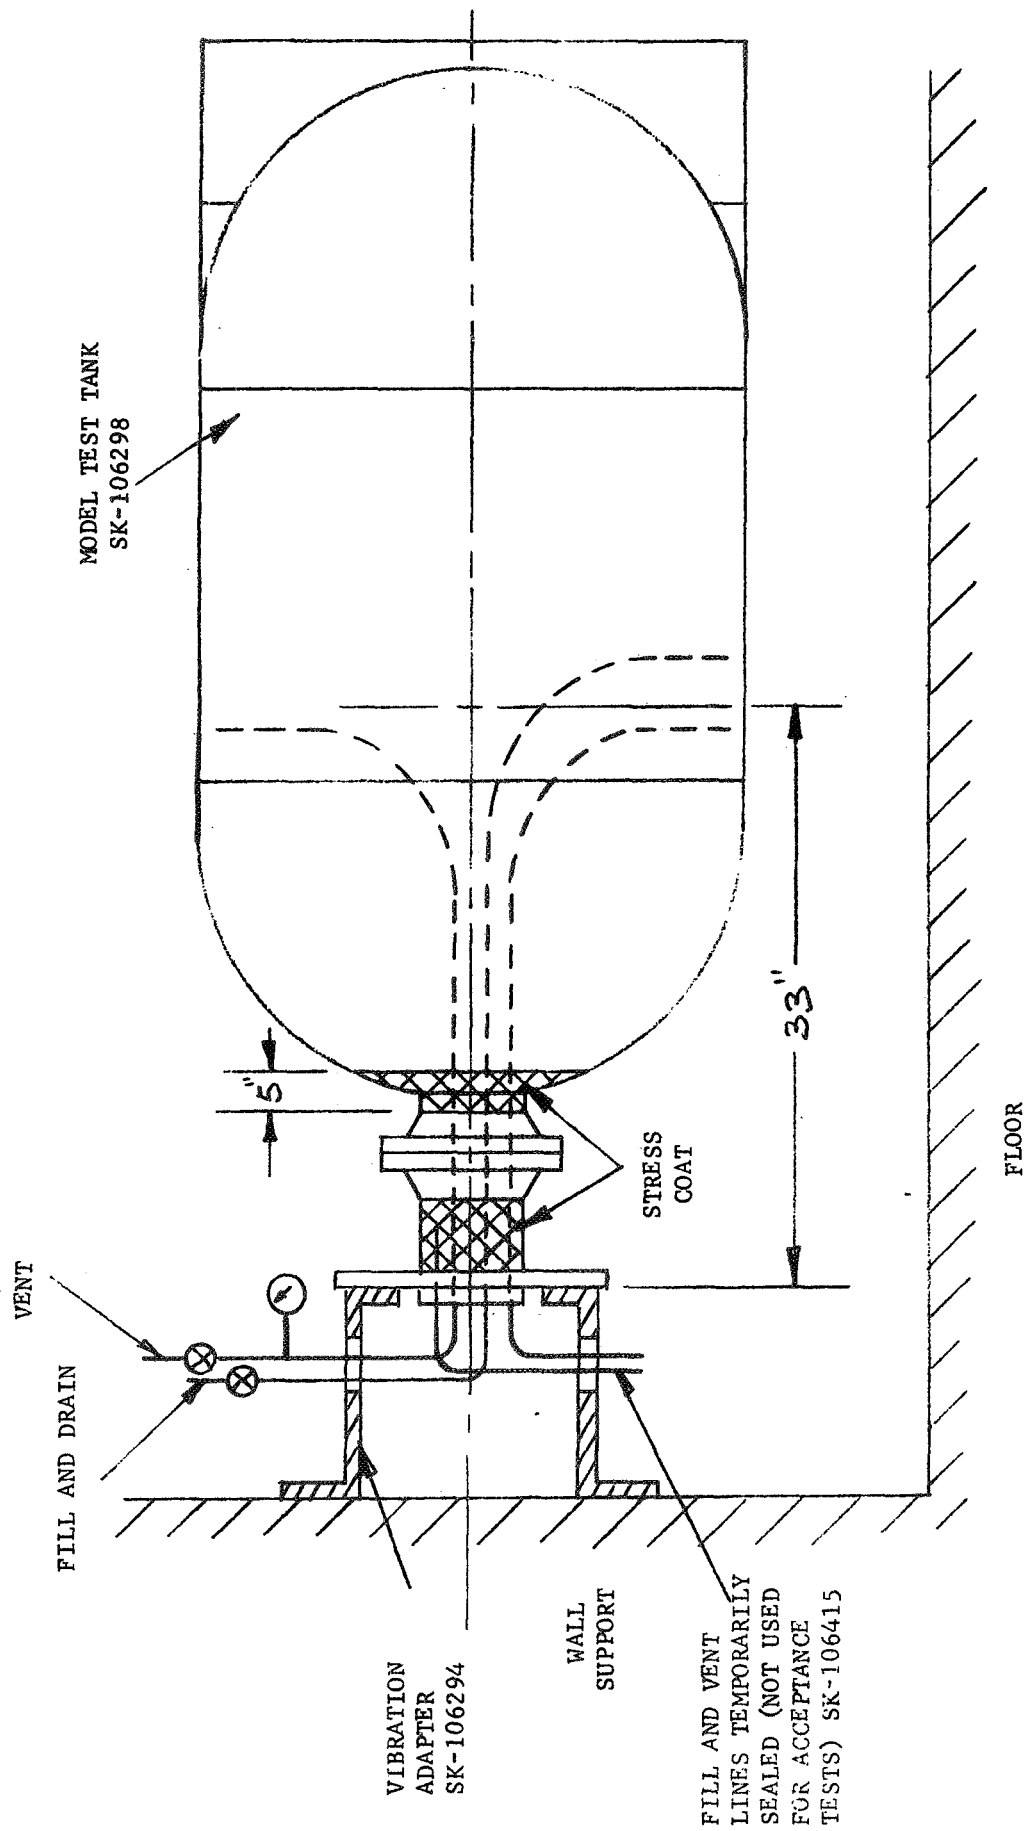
TEST SET-UP - CANTILEVER (AXIS HORIZONTAL)
